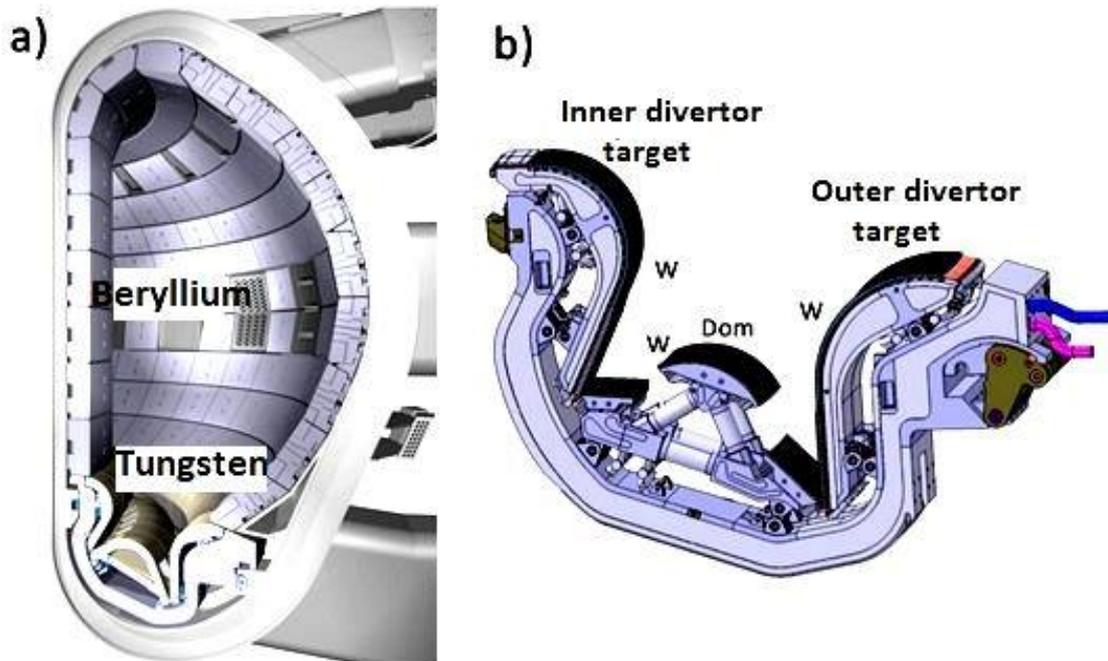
a) ITER chamber section b) Divertor section assembly
